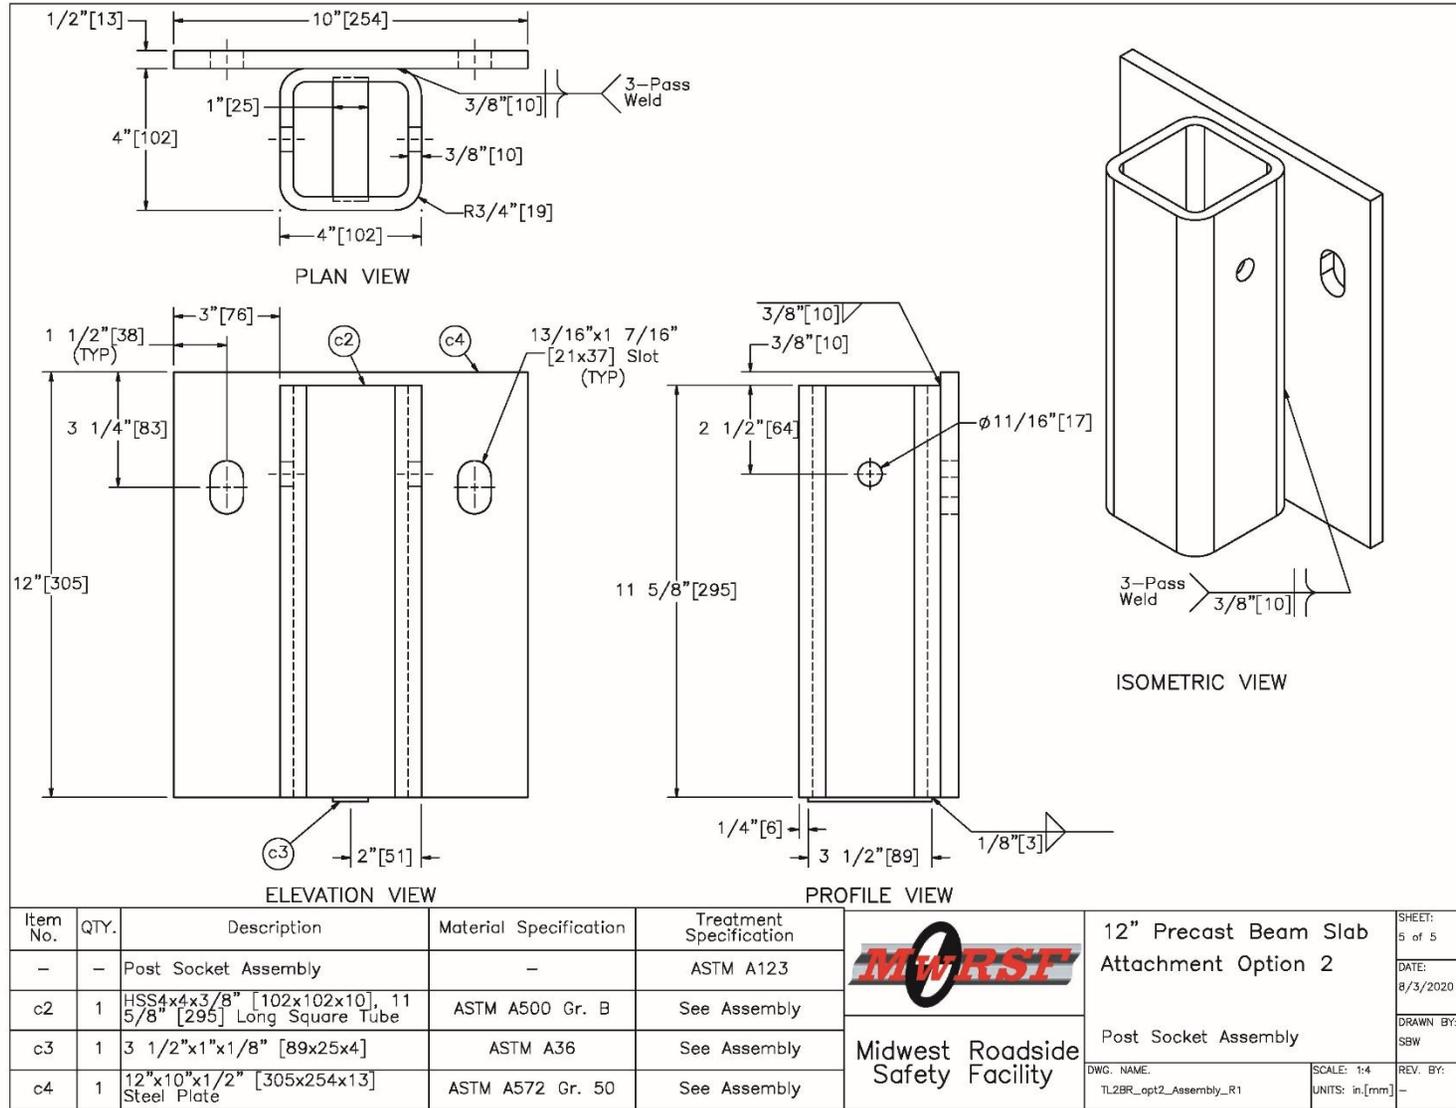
System Details, TL-2 Bridge Rail Attachment to 12-in. Deck, Option 2, Socket Assembly
